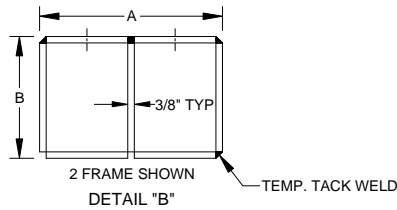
B24. Multiple cable penetrator details (types RGS and RGA) - Continued.
